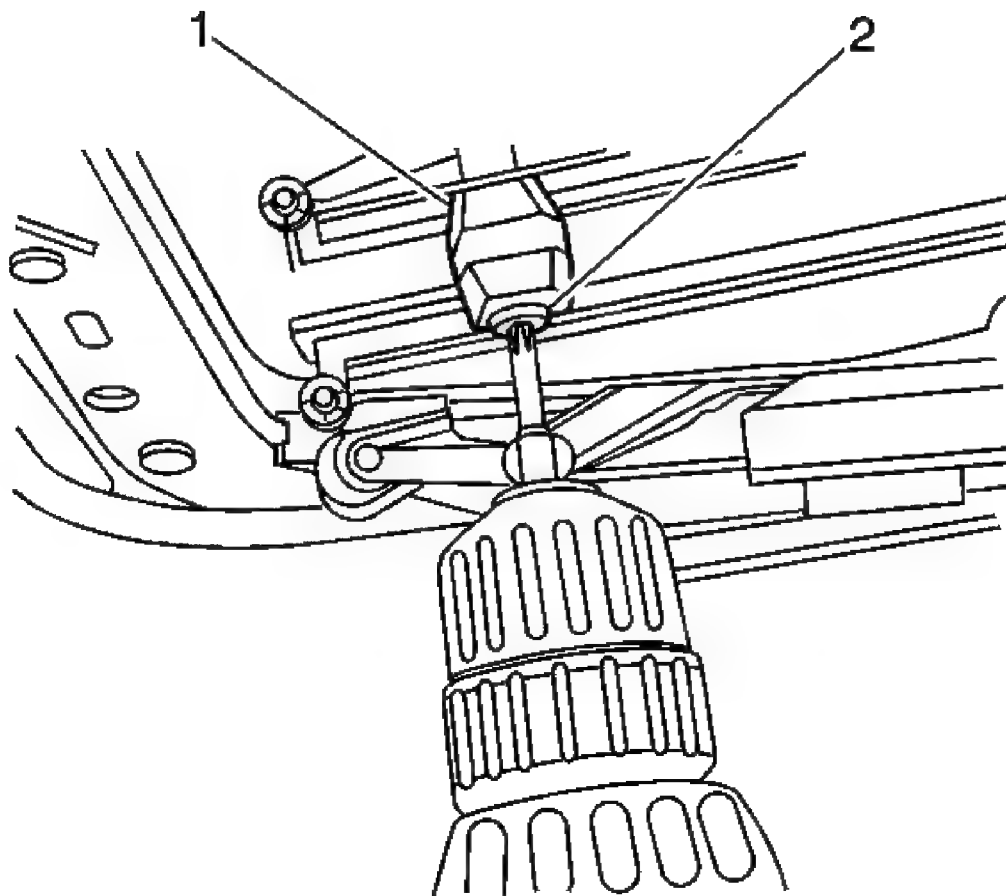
Locating Front Screws Retaining Sunroof Window To Sunroof Slider Arm
